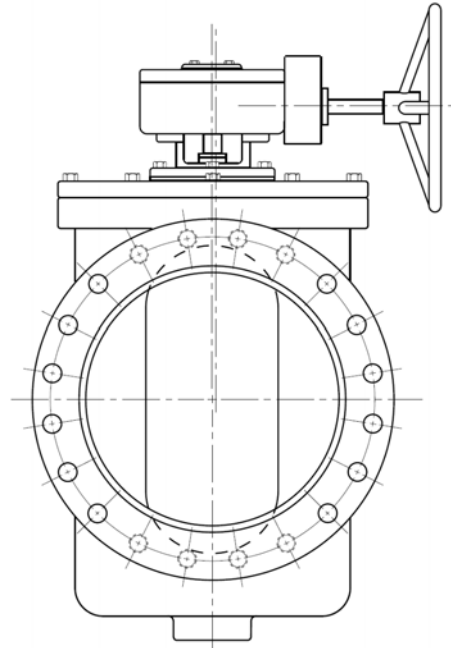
PLUG VALVE WITH GEAR ACTUATOR
